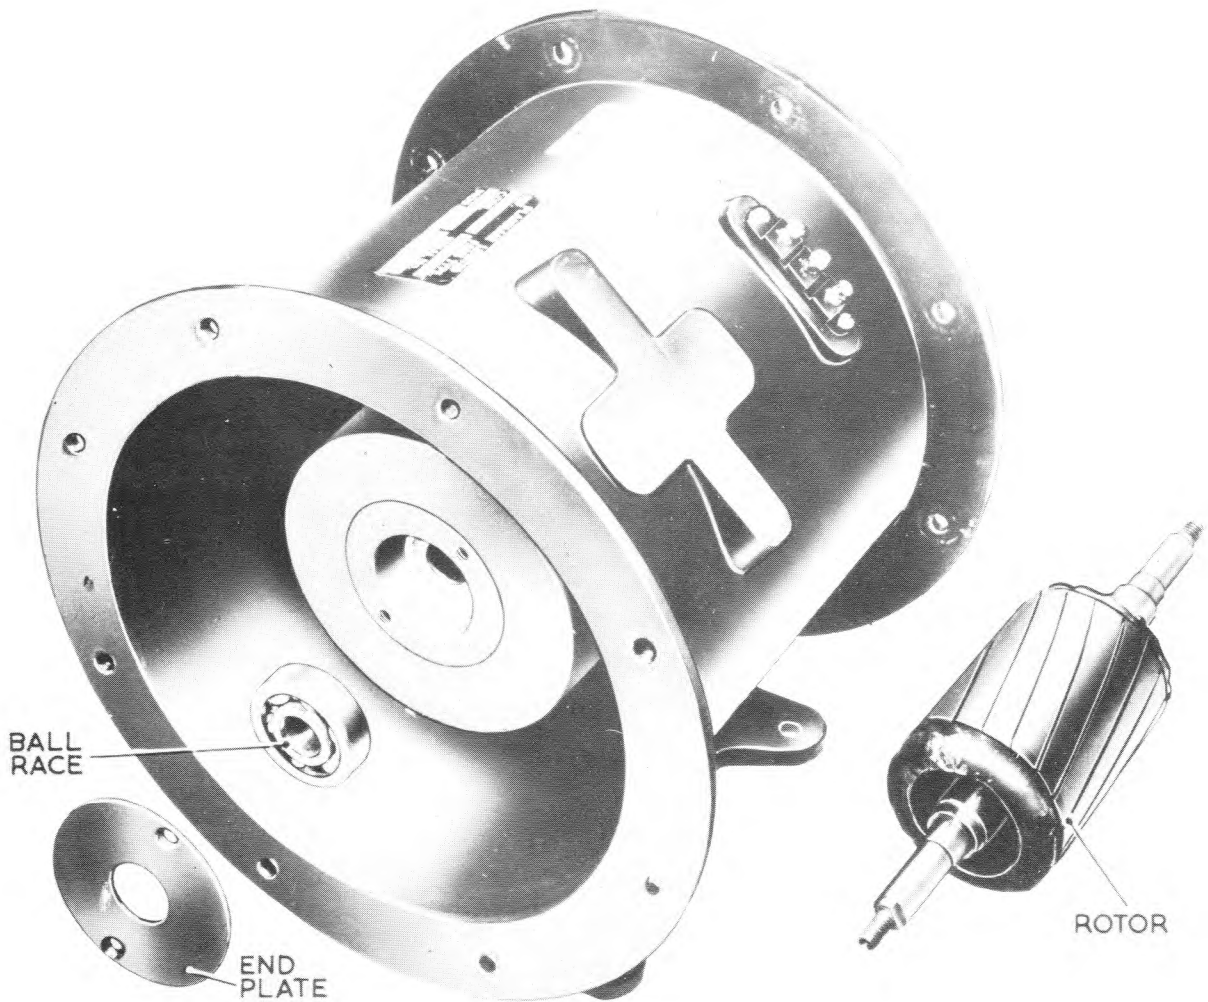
First stage impeller end of fan with end plate, bearing and rotor removed
